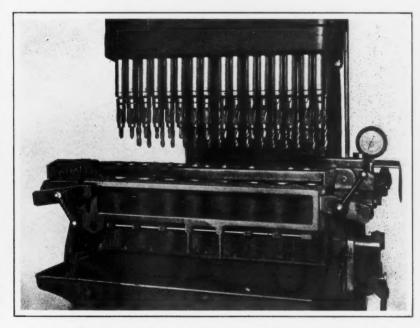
Machine Arranged with Two Rows of Tools for Machining the Valve Seats and the Valve-stem Guide Holes Successively
